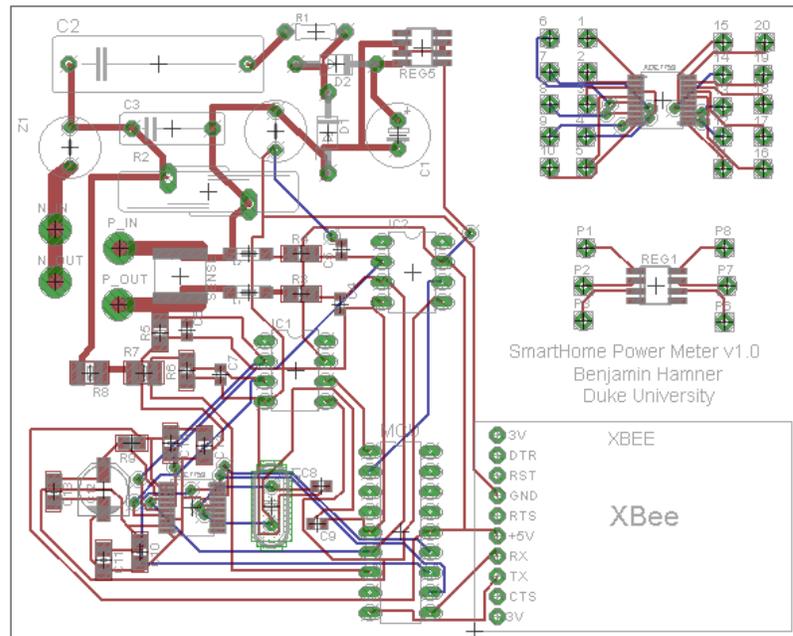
This figure shows the custom PCB layout. There are an additional ADE7753 and voltage regulator in the top-right corner so that these sections could be cut off the PCB and used to put a surface-mount package on a breadboard for testing.
